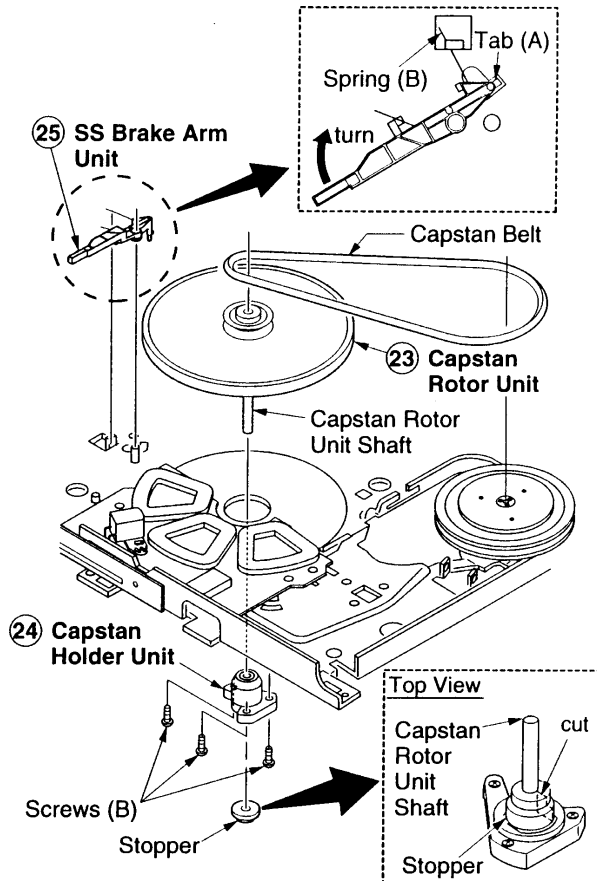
Capstan Rotor Unit/Capstan Holder Unit/SS Brake Arm Unit Removal
